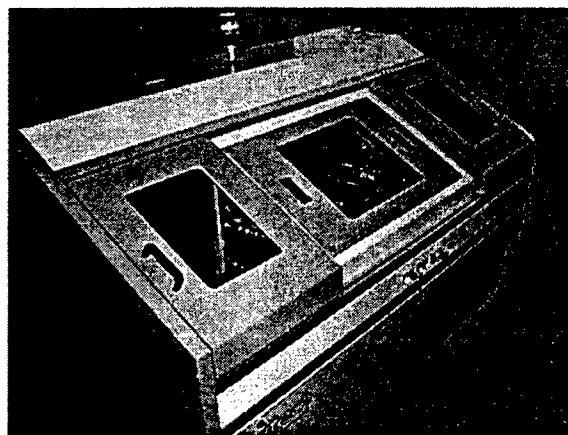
Exitech M6000 ink jet printer nozzle drilling tool
